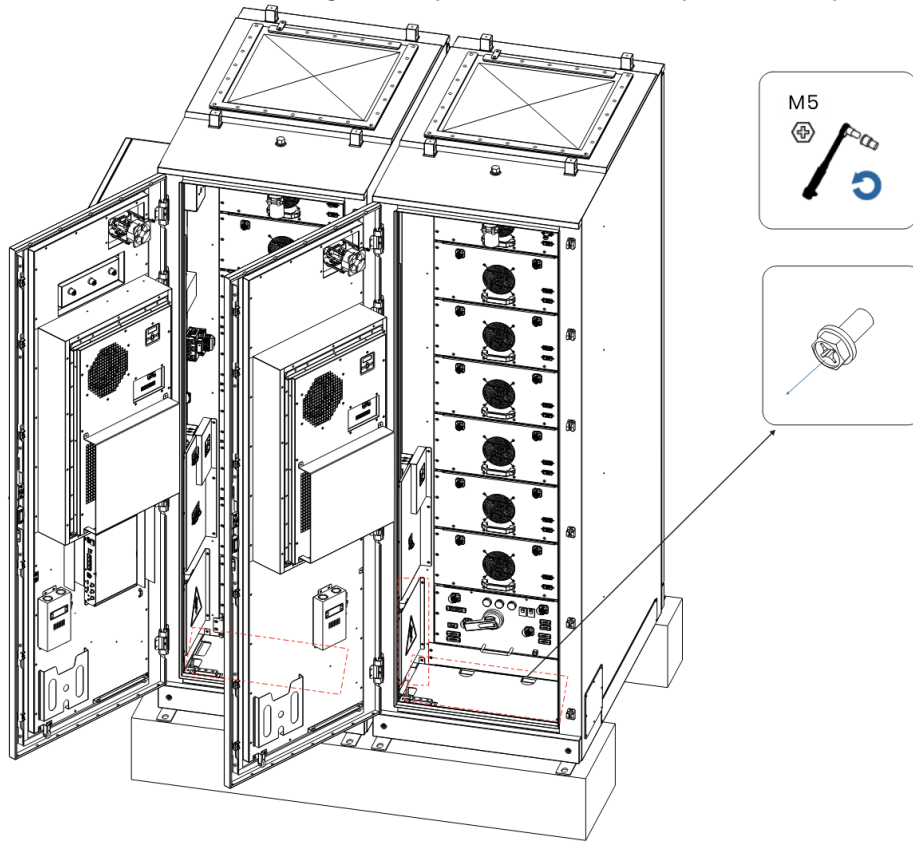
Remove the bottom shielding cover plate and the PC protective plate.
